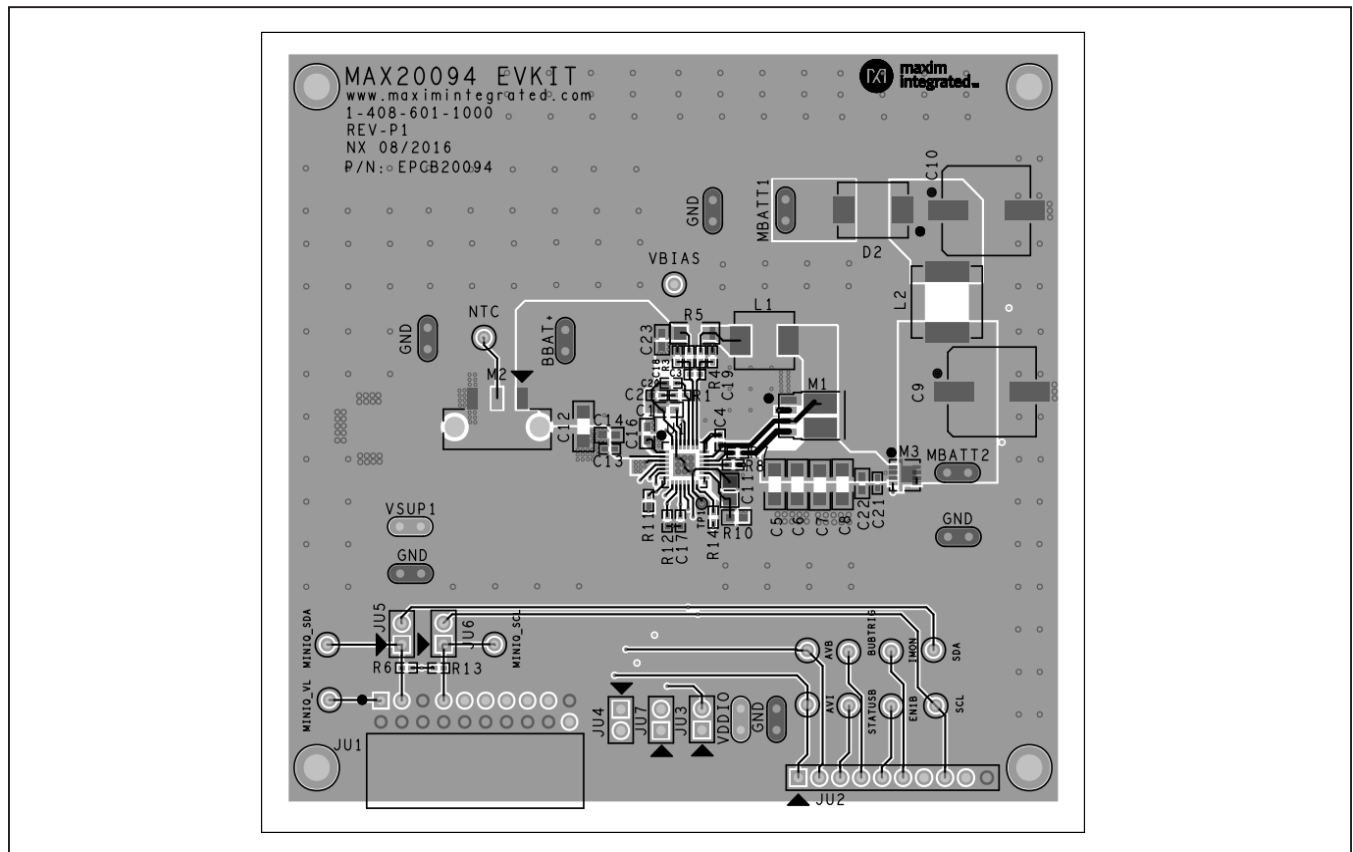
MAX20094 EV Kit Component Placement Guide/PCB Layout
